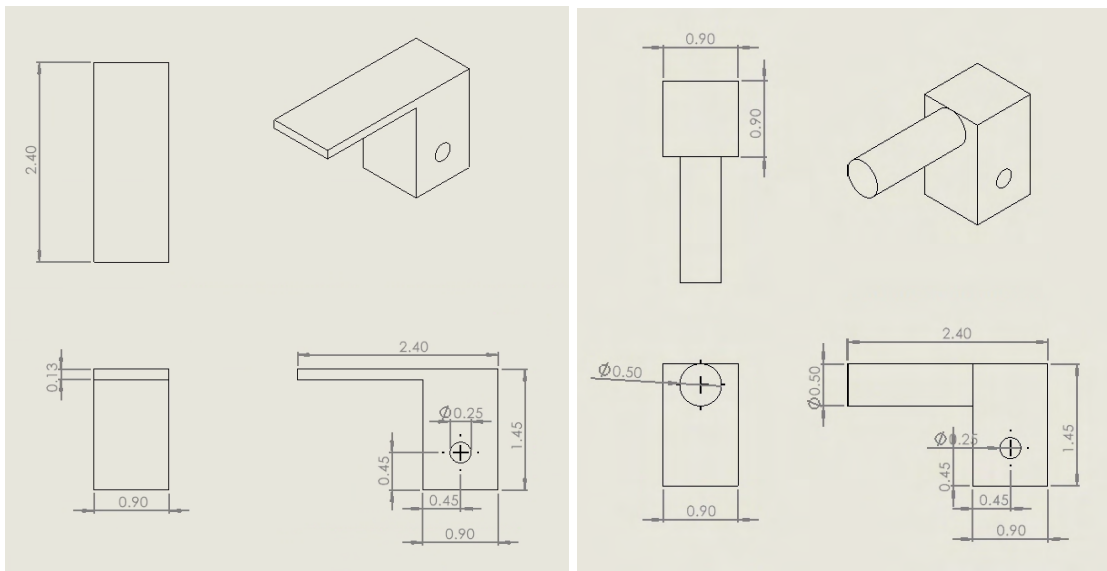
This figure shows the engineering drawing of the slider mechanism.
